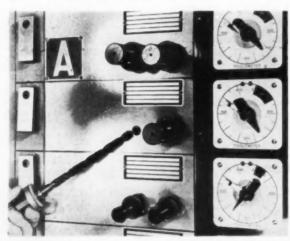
Tool operations can be programmed with a toolometer. It counts the number of tool operations and shuts down the machine when the schedule is completed. The time for tool change is predetermined, not guessed at by the operator
